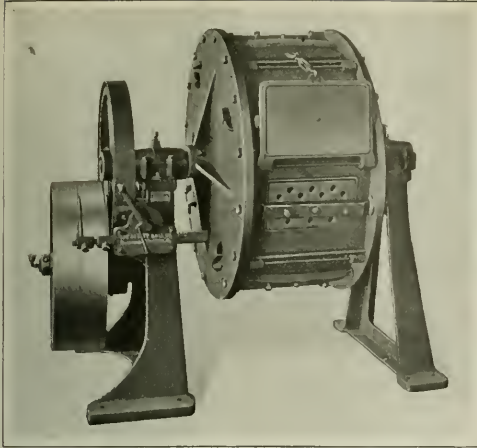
Ball Burnishing Barrel which is a Recent Development of the Abbott Ball Co.
